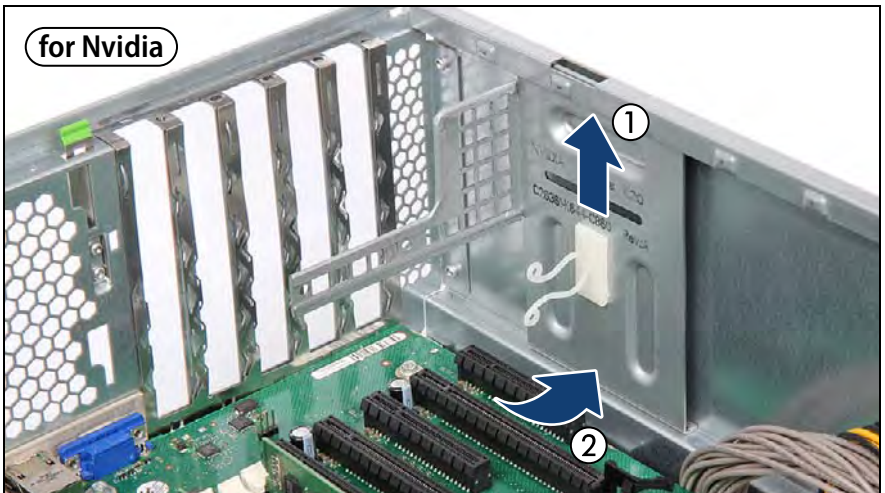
Installing the GPGPU card mounting bracket (Nvidia) (B)
